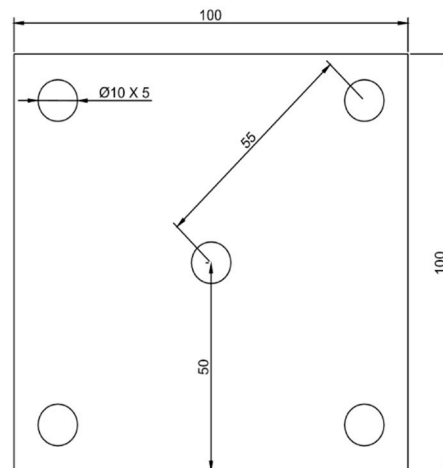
Top view of the workpiece for the circular-patch welding test (unit: mm).
